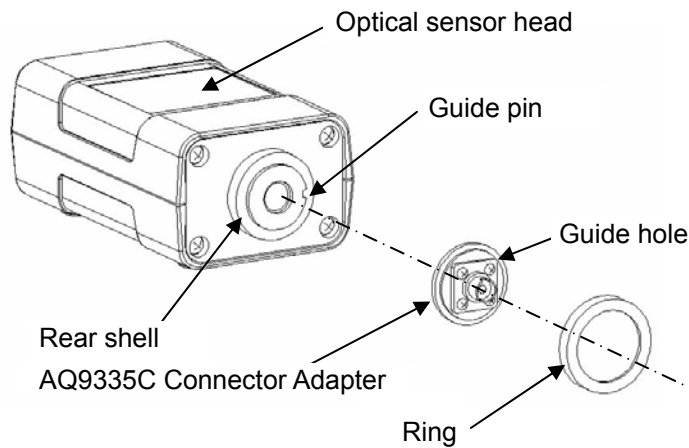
Connecting the Connector Adapter to the Optical Sensor Head
